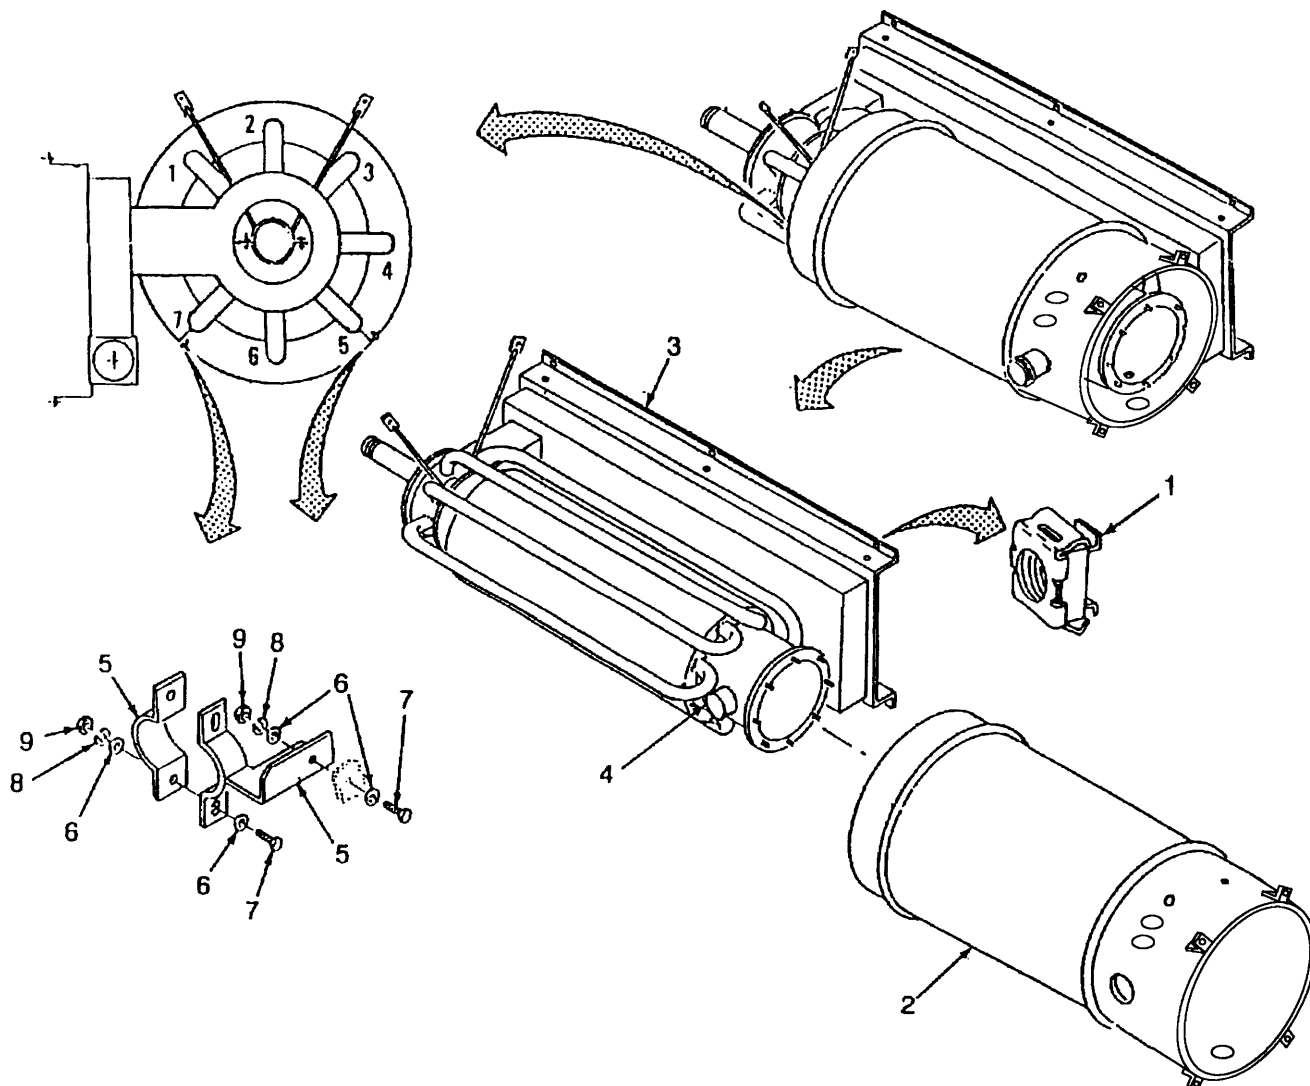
Heat Exchanger, (Model H120-1) Assembly
